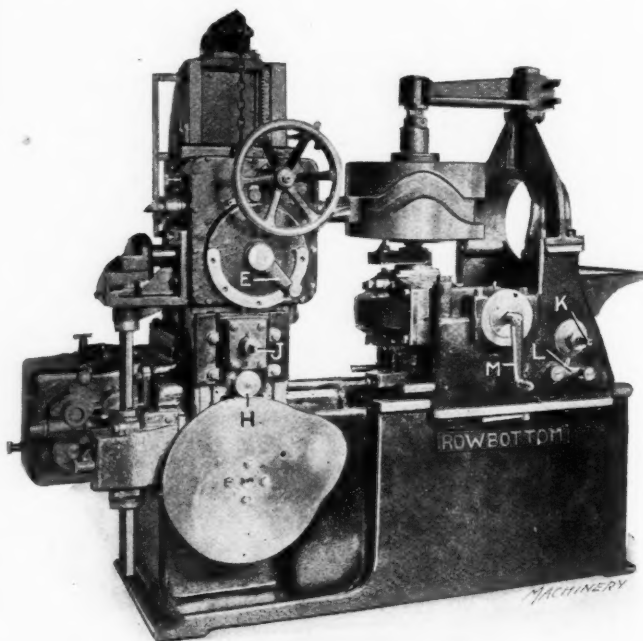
Rowbottom Machine engaged in milling a Cylindrical Cam
